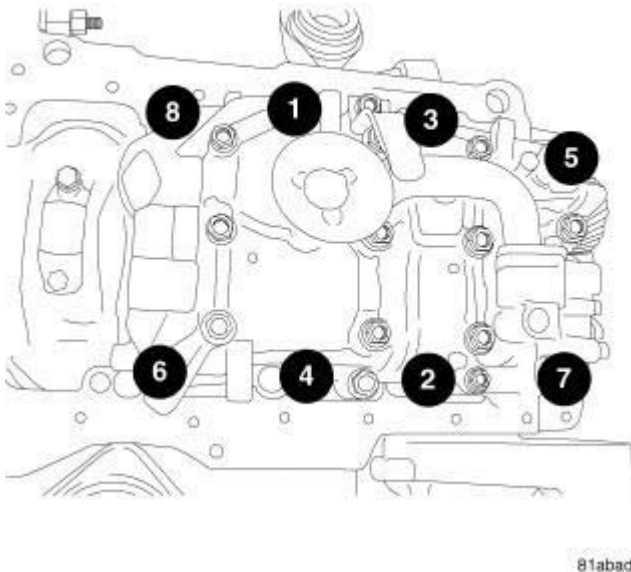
Balance Shaft Retaining Bolt Torque Sequence
